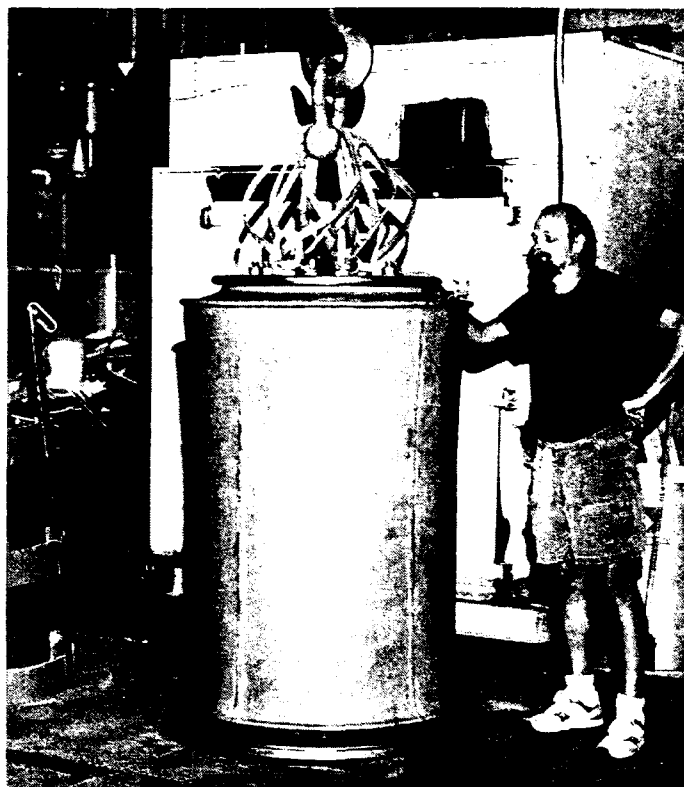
Isostatic pressing mold for 26-inch-housing alumina cylinders.
